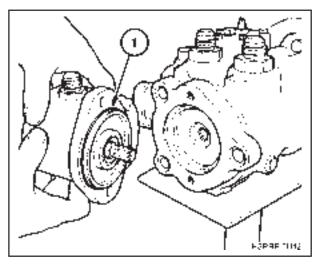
HYDRAULIC PUMP MOUNTING 1. 'O'Ring
